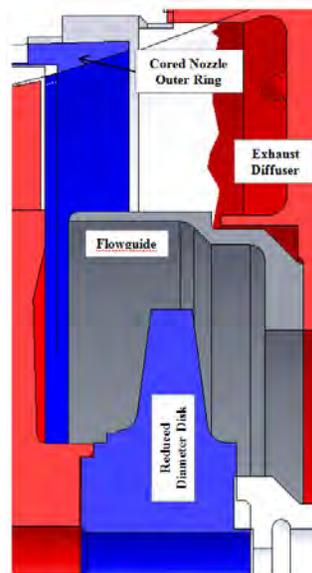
Turboexpander Module Checkout Test Turbine Section
